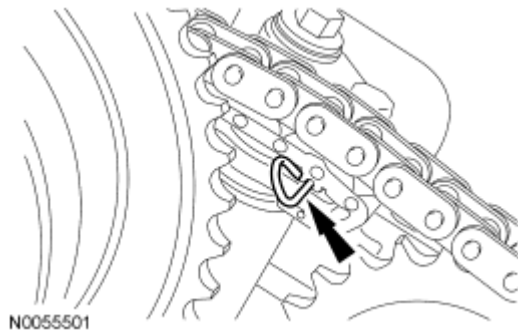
Locating Lock Pin On LH Secondary Timing Chain Tensioner
